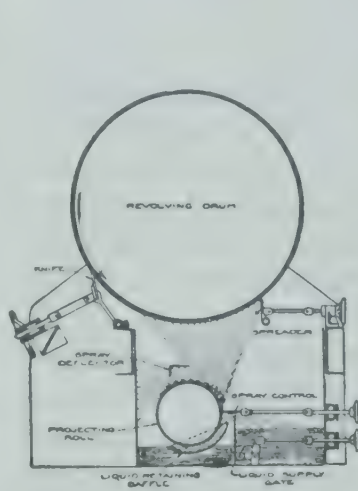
Single drum drier with spray film feed. (Buflvak Equipment, Division of Blaw Knox Co.)
